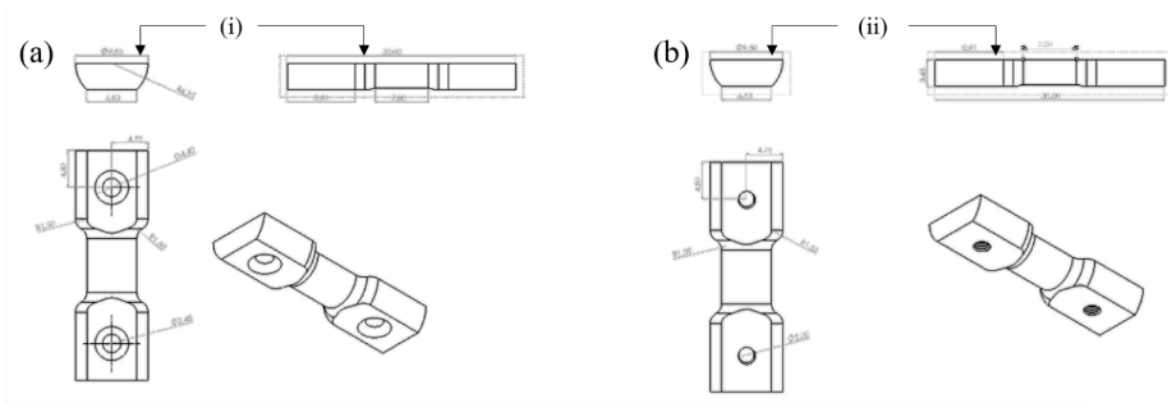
Two halves of sample designed to test the resolution of various inspection methods. Threaded holes allow fastening shown in (a), laser process surface marked by (ii) in (b). All dimensions given in mm.
